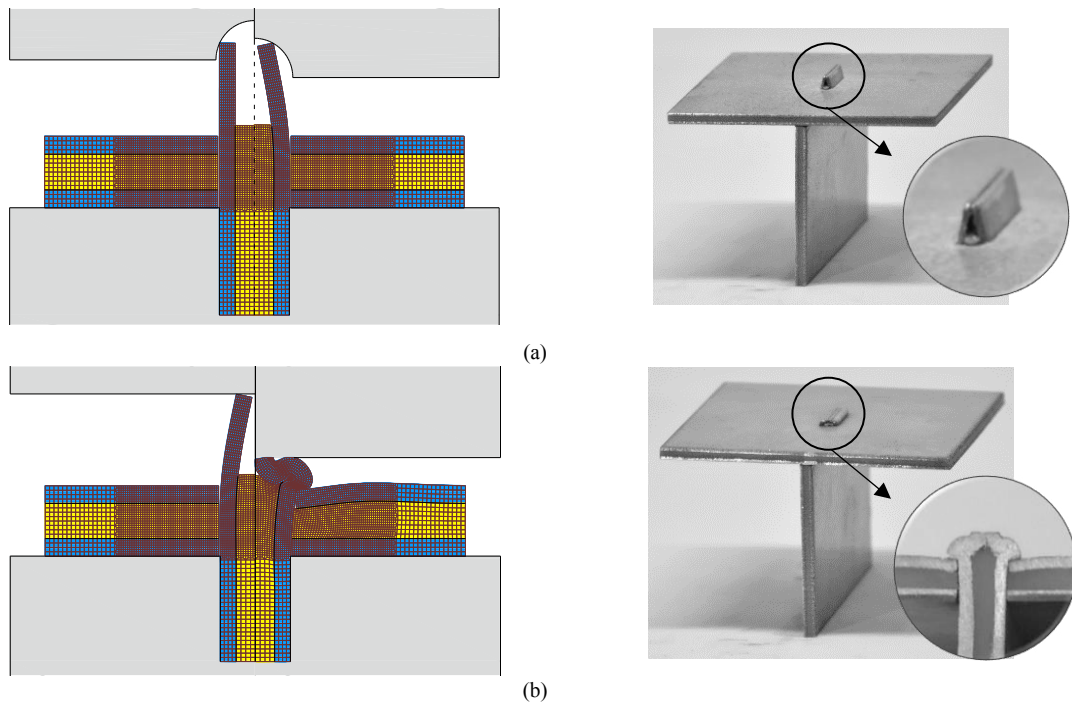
Assembling two sandwich composite panels perpendicular to one another by means of the new joining by forming process. (a) Finite element predicted cross section and photograph of a joint at the beginning and end of the second stage ($l_0 = 2.5$ mm); (b) Finite element predicted cross section and photograph of a joint at the beginning and end of the third stage ($l_0 = 2.5$ mm).
